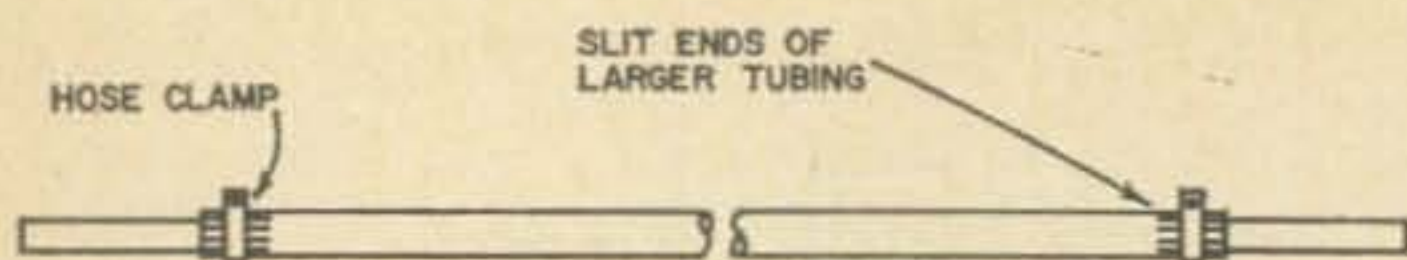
Construction of a typical element, showing the adjustable end sections.
